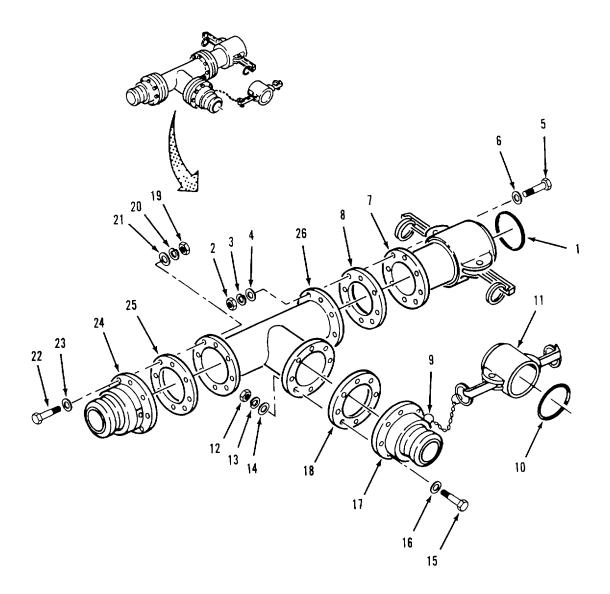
Tee Assembly (9112-Y2) Disassembly.
